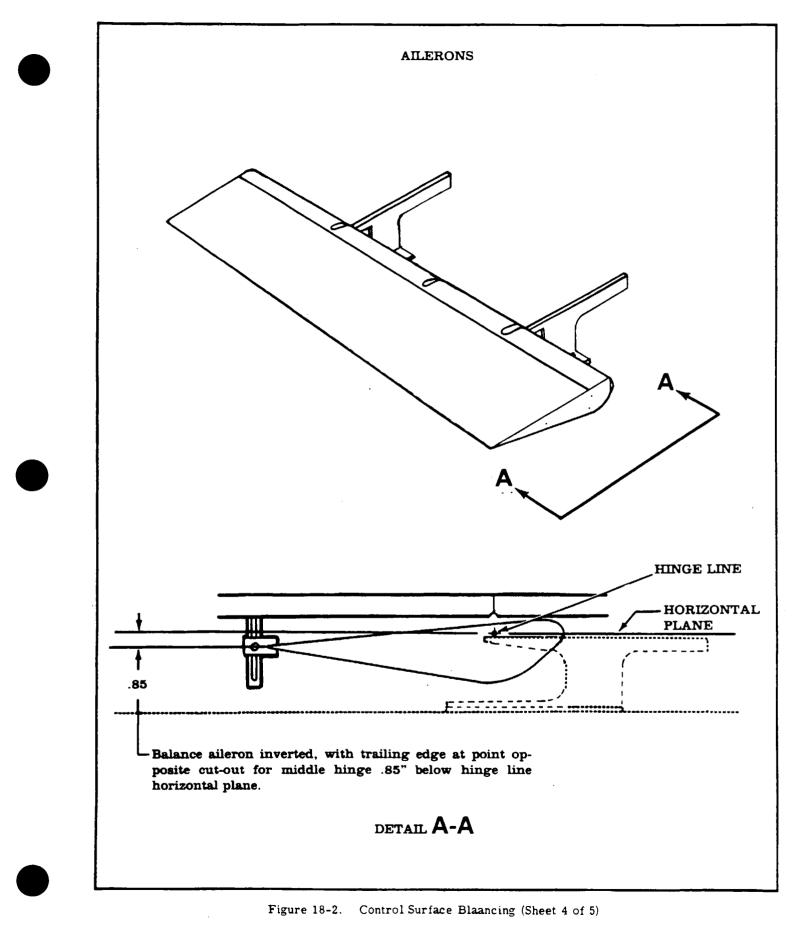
Control Surface Balancing (Sheet 3 of 5)
